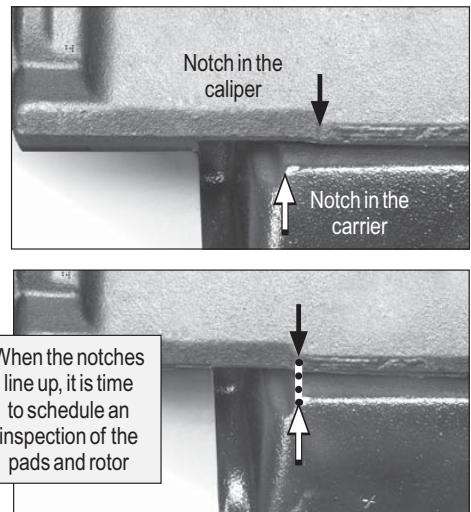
STYLE A - WHEN BOTH CARRIER AND CALIPER HAVE A CAST NOTCH
